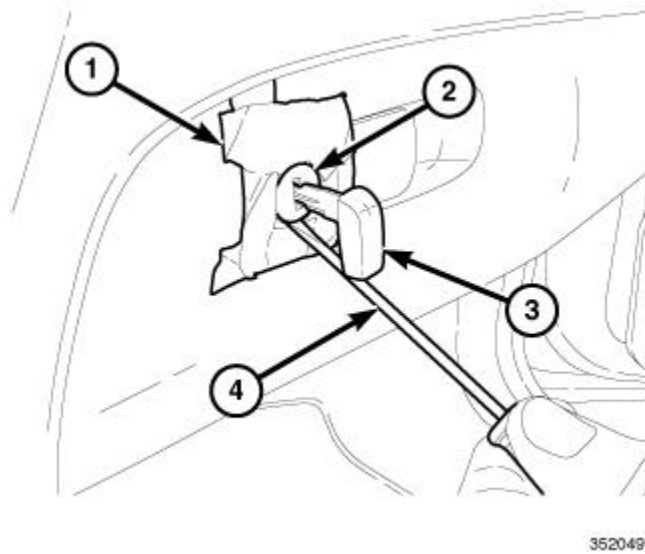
Masking Tape, Lock Cylinder, Key & Screwdriver
